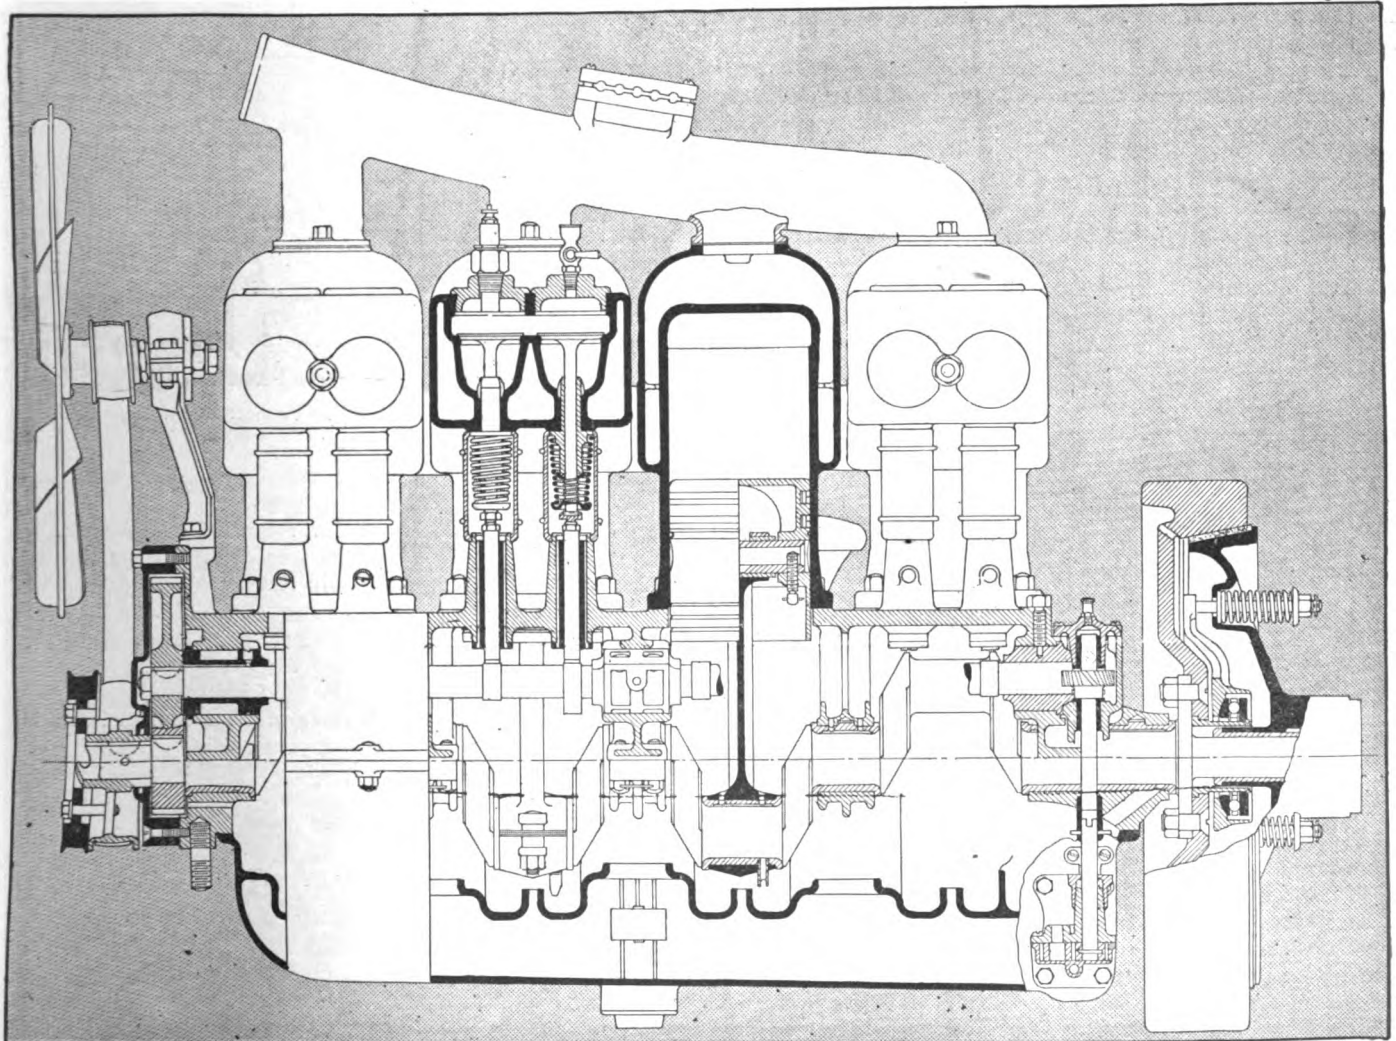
Side part sectional view of the motor of Overland model 71, showing single-cylinder castings
